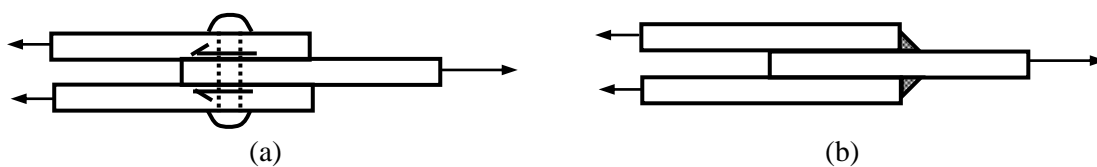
Direct shear in (a) rivet, (b) weld
